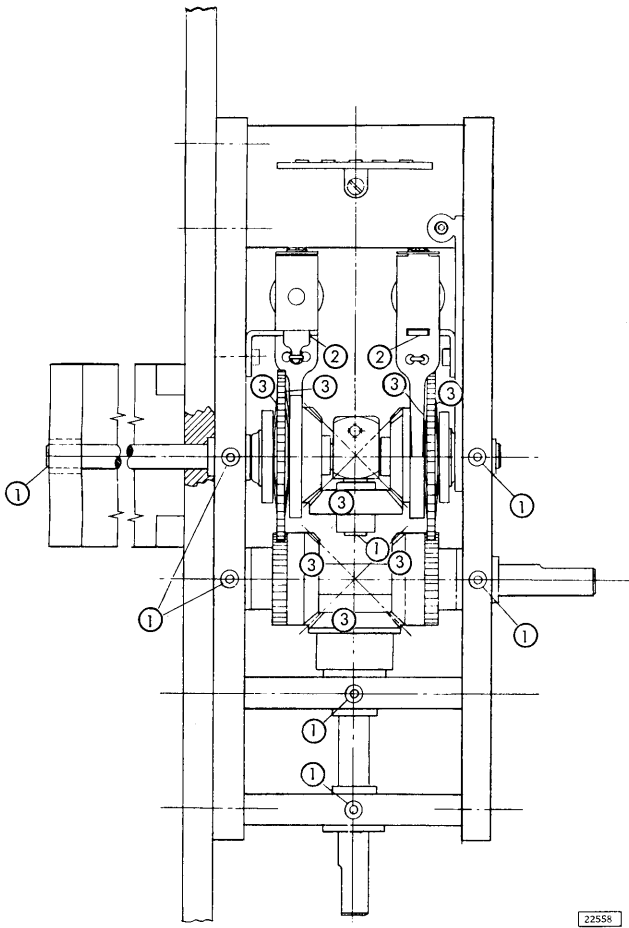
Lubrication Points, Capstan Drive Mechanism
